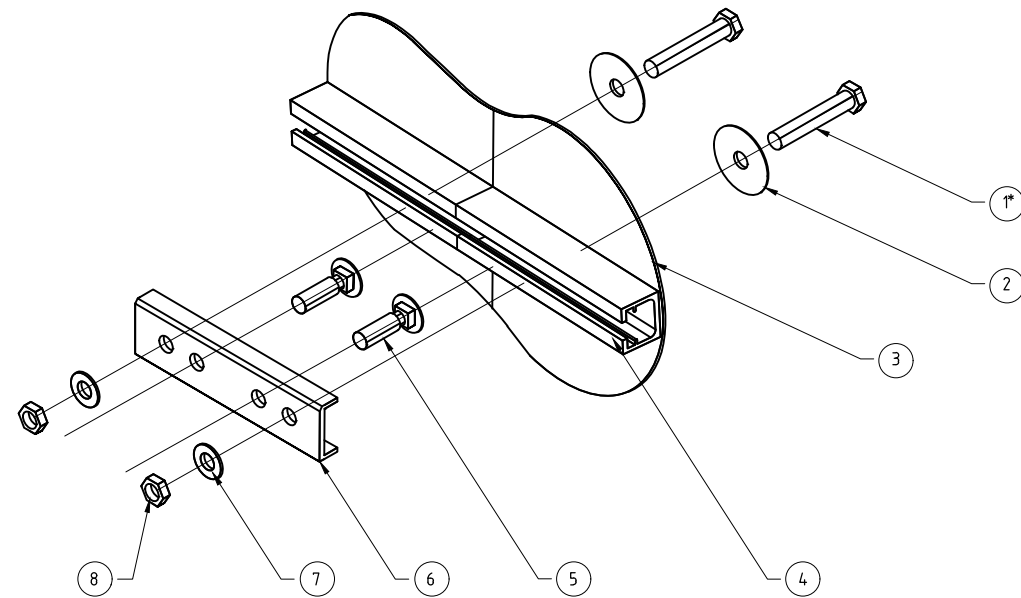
HEAVY DUTY CLAMP ASSEMBLY
